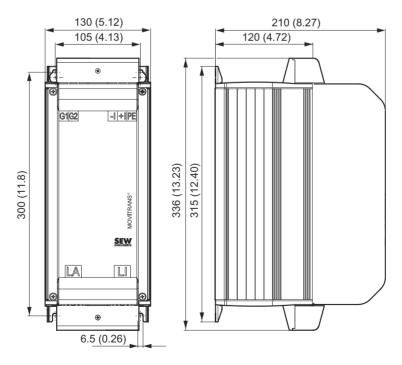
Dimensions for MOVITRANS® size 2, dimensions in mm (in)
